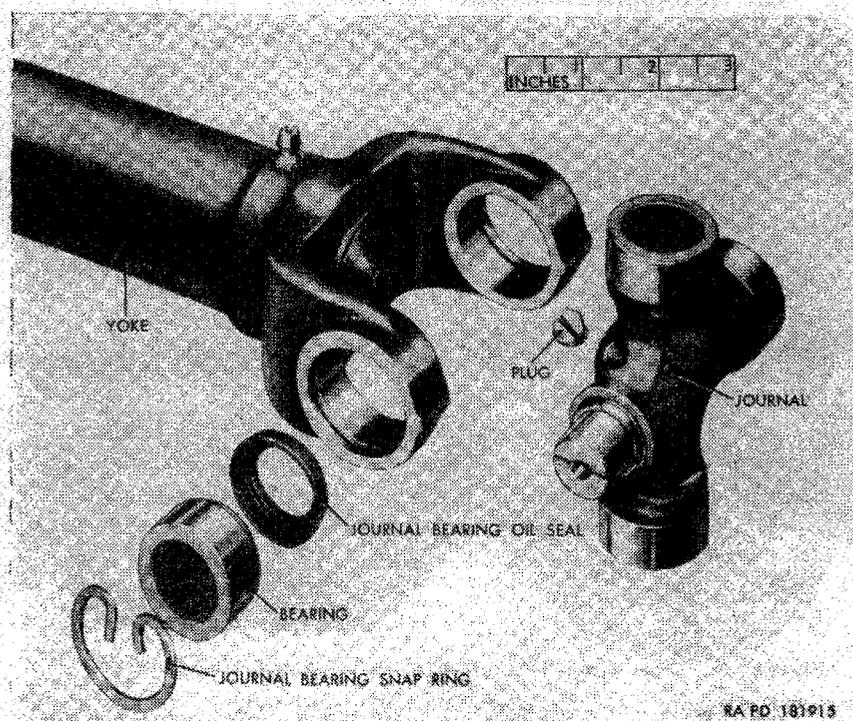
Front propeller shaft universal joint and yoke—partially exploded view.
